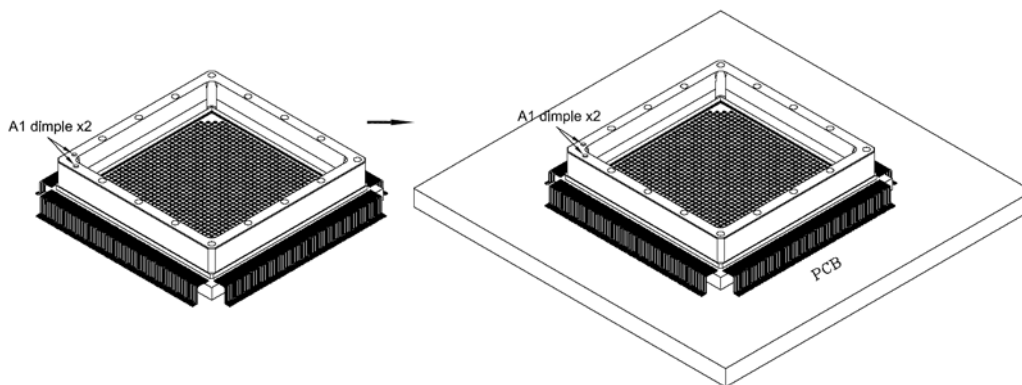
• Reflow Adapter (with socket housing mounted) to PCB
